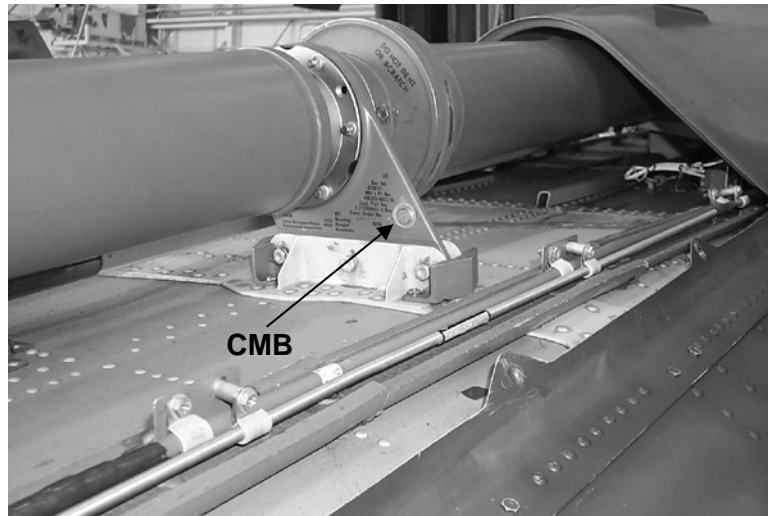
Aft Hanger Bearing Assembly (AH-64A/D) with CMB Installed
